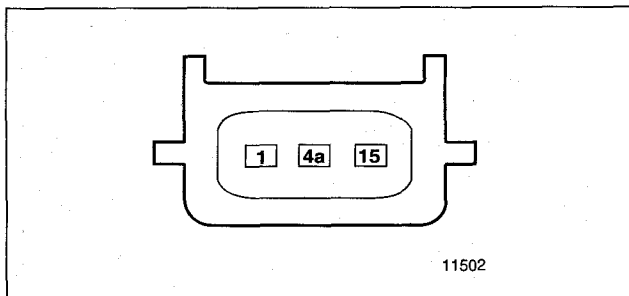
Ignition coil harness connector terminal identification for M42 engine.
